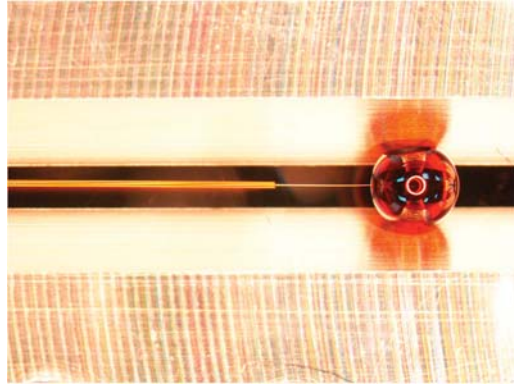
Photo of a SymCap fill tube assembly in shipping cradle ready for shipment to LLNL for final assembly.
